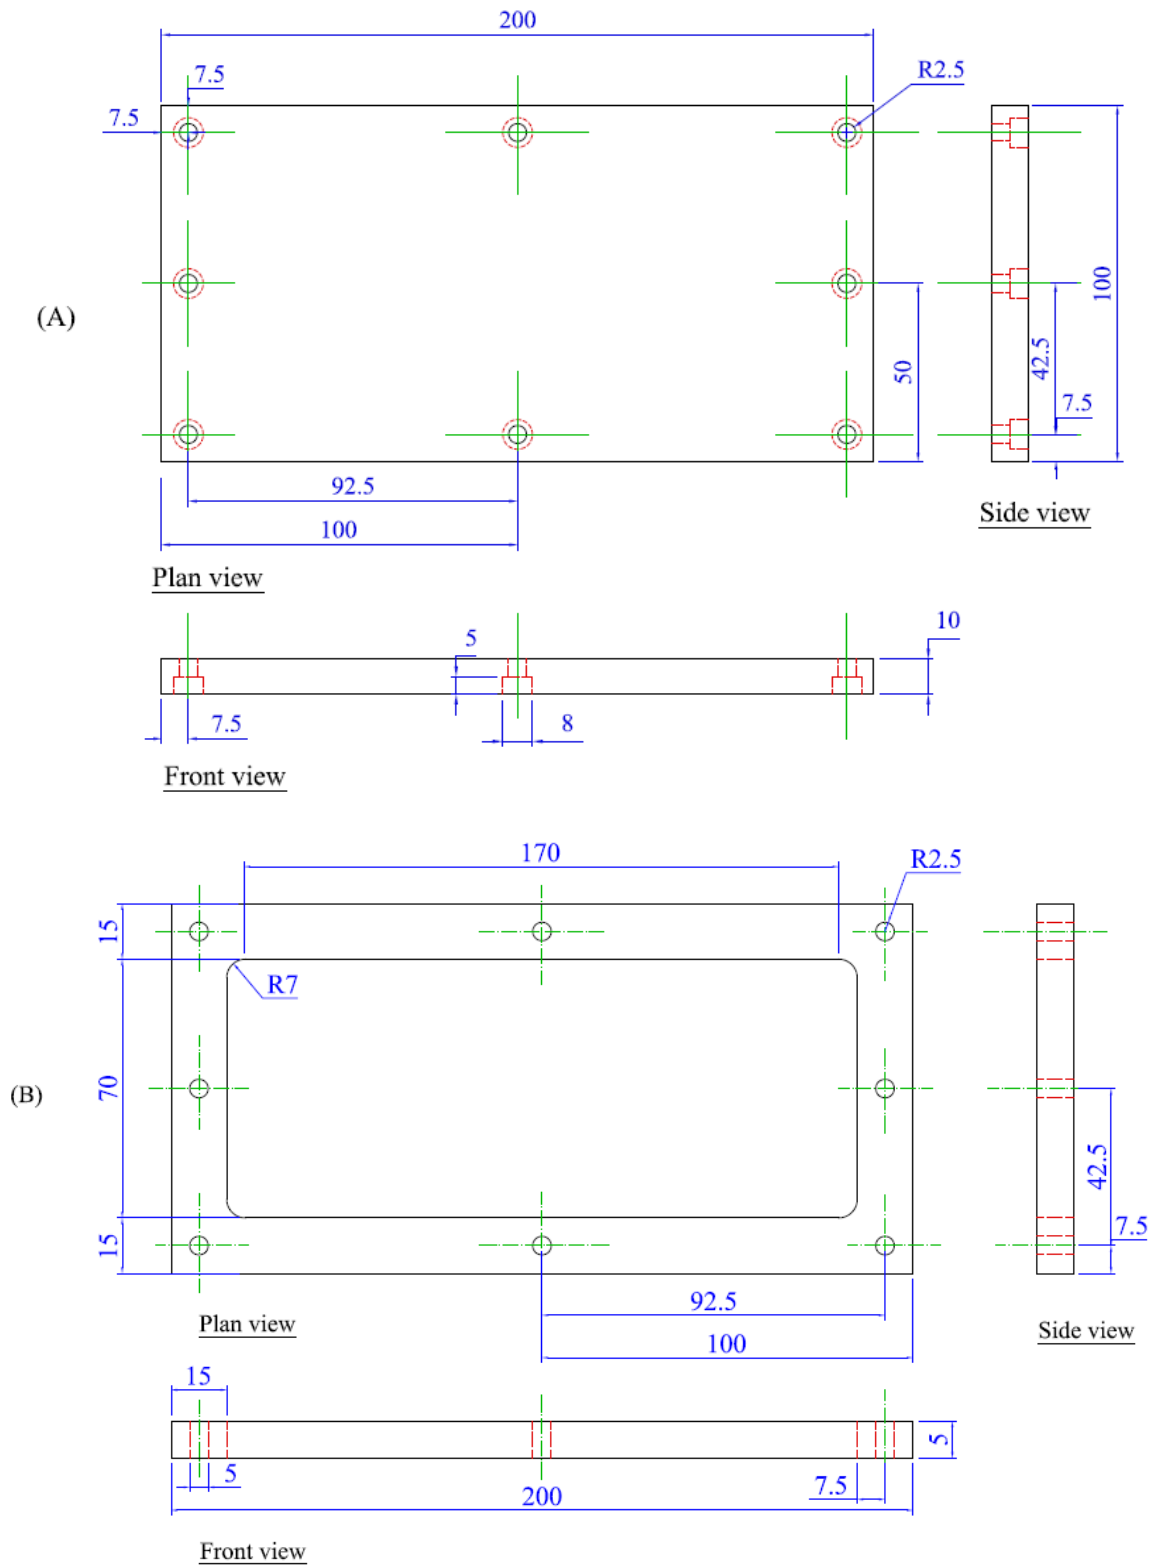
Orthographic views of mold parts: (A) base part, (B) upper part.
